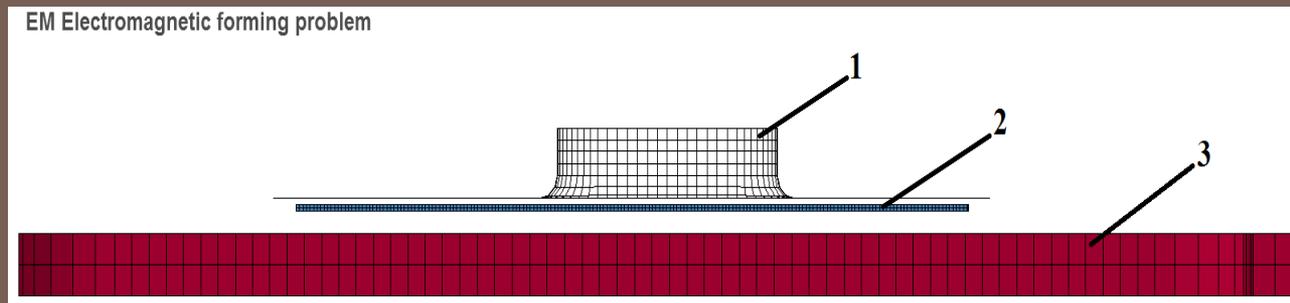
Scheme of electromagnetic sheet stamping: 1 – die; 2 – blank; 3 – coil.
